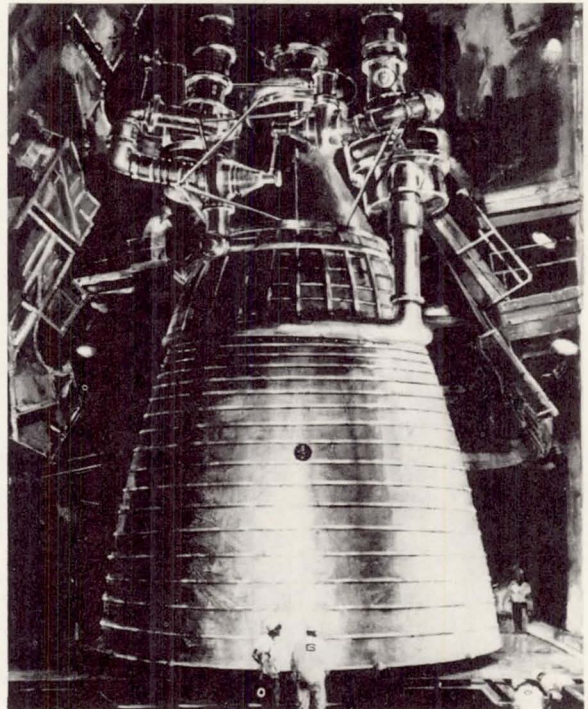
M-1 engine. (Courtesy Aerojet General Corp.)
